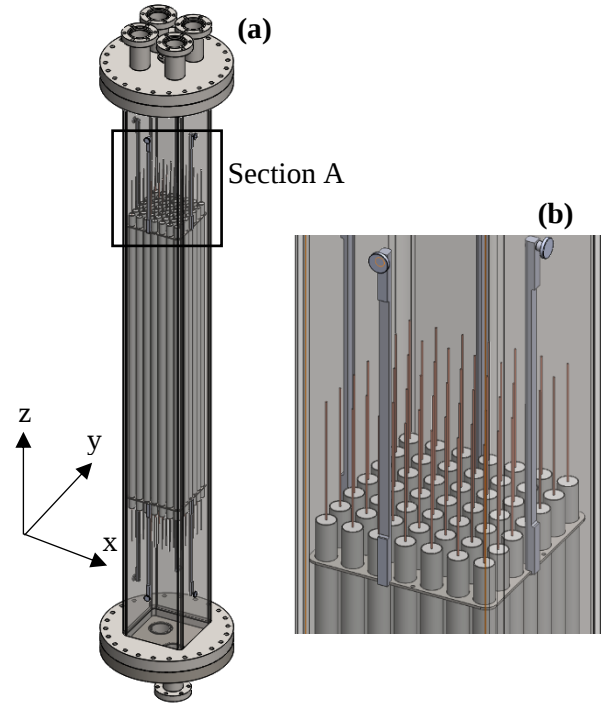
(a) Assembled model of experiment, (b) Enlarged view of Section A
